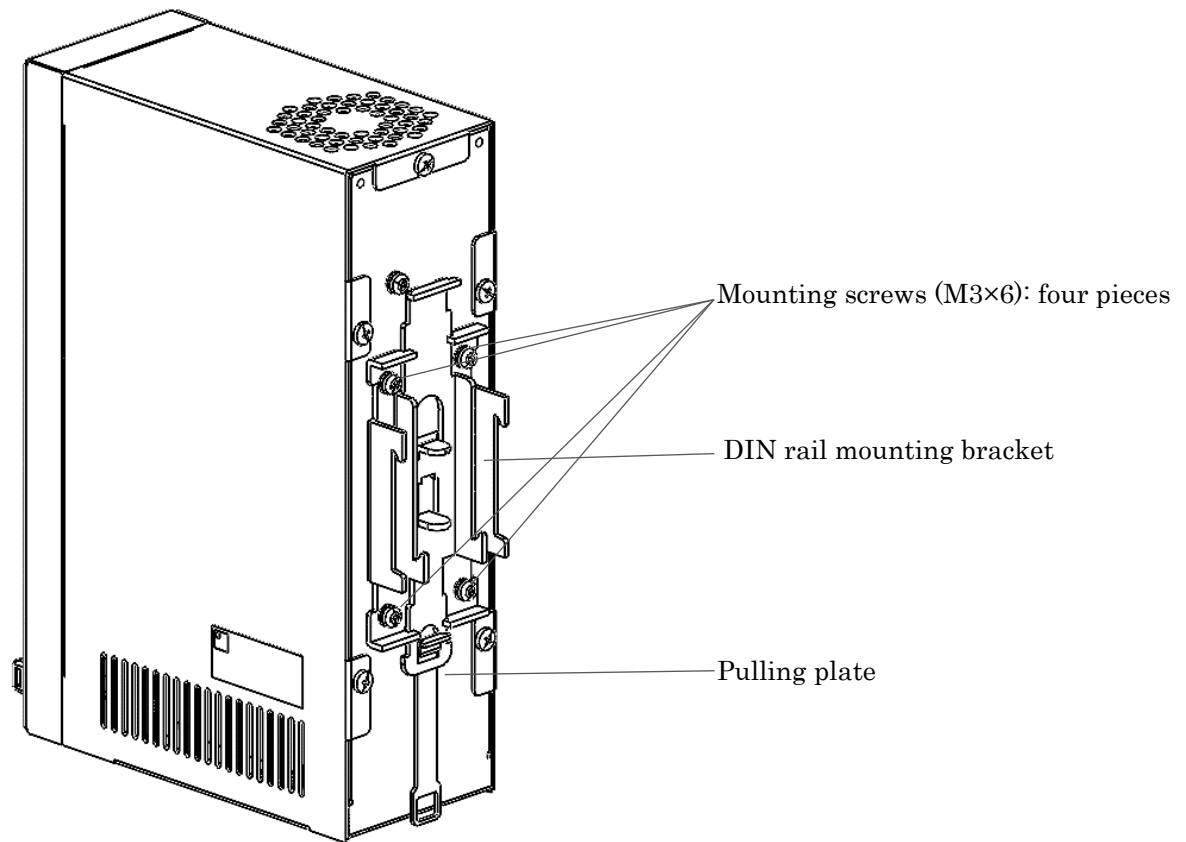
DIN rail mounting bracket installation drawing (rear face)
